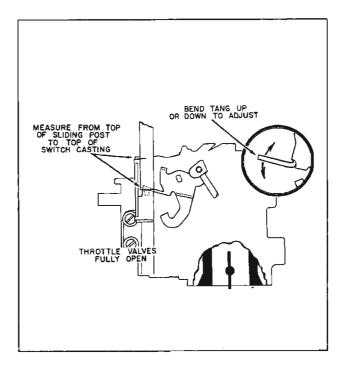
B-17 Vacuum Switch and Adjustment (Center Carburetor)
